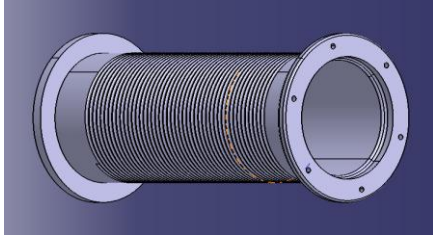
Isometric View of Winch Shaft as a welded Component
